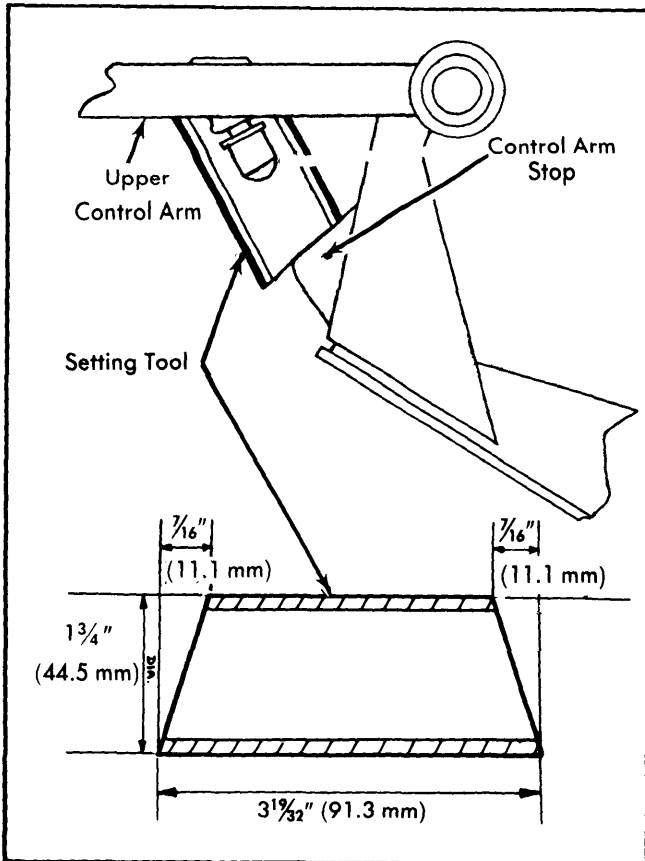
Dimensions for Fabricating the Two Necessary Setting Tools
